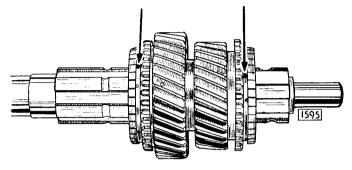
Showing the holes through which the thrust washer locking plungers are depressed.
